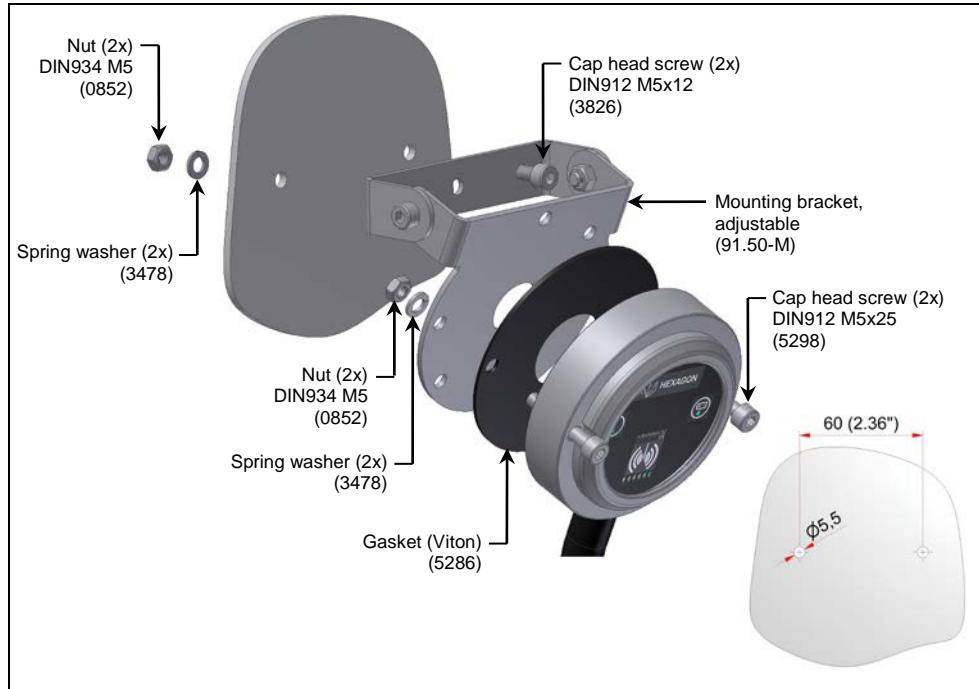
Mounting RWR95.50-R with Mounting Bracket
